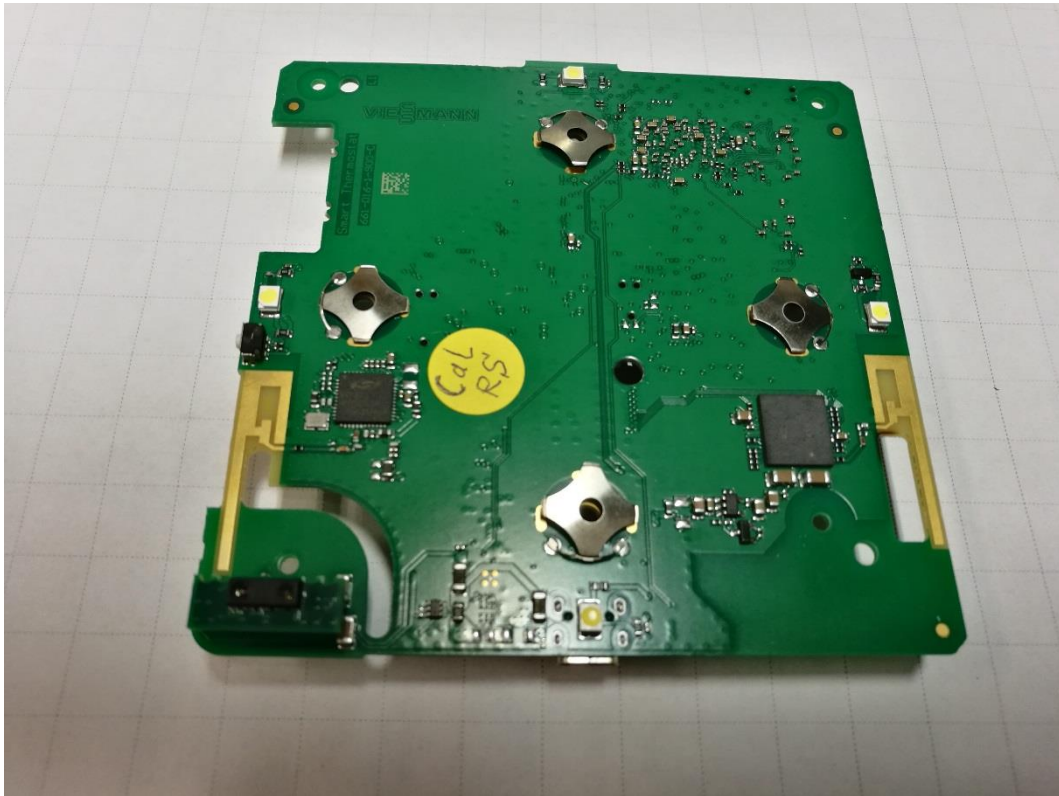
ViCare Thermostat –Housing Bottom Side
